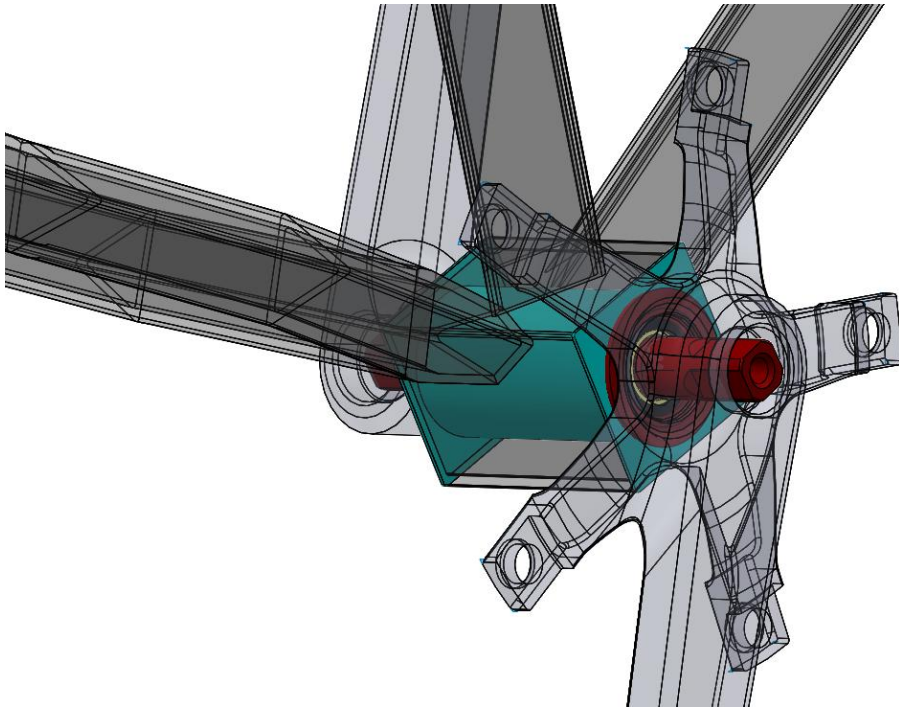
Bottom bracket integration into the rectangular frame. Blue part is part of the frame - assembled by welding of two laser cut pieces and tube which is meant for bottom bracket shell. Red part is bottom bracket cartridge. Please see section view of figure x.x. for more details.
